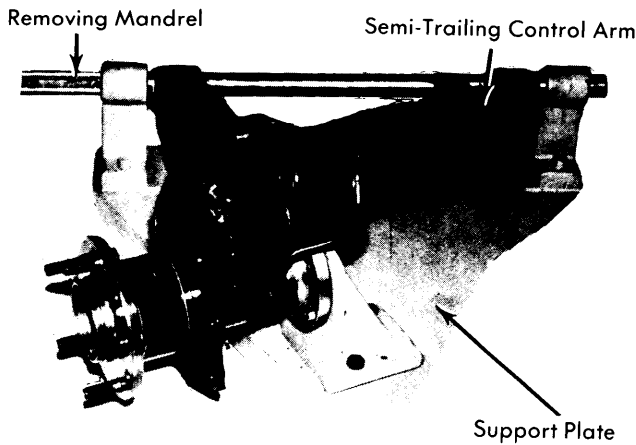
View Showing Control Arm Bushing Replacement Procedure
